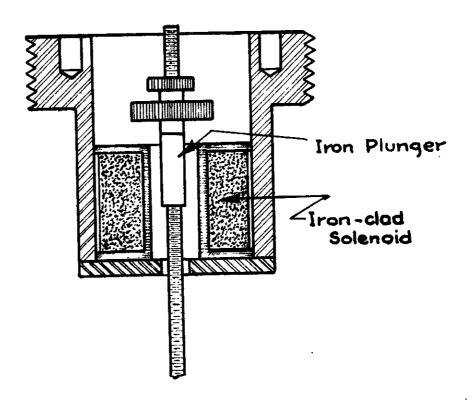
CROSS-SECTION ELECTRIC GAUGE HEAD
